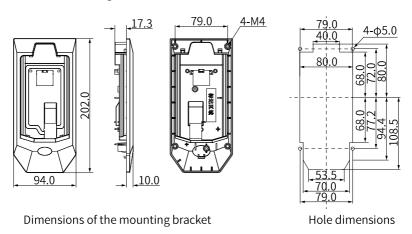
Base mounting bracket dimensions and hole sizes (mm) of the SOP-20-810
